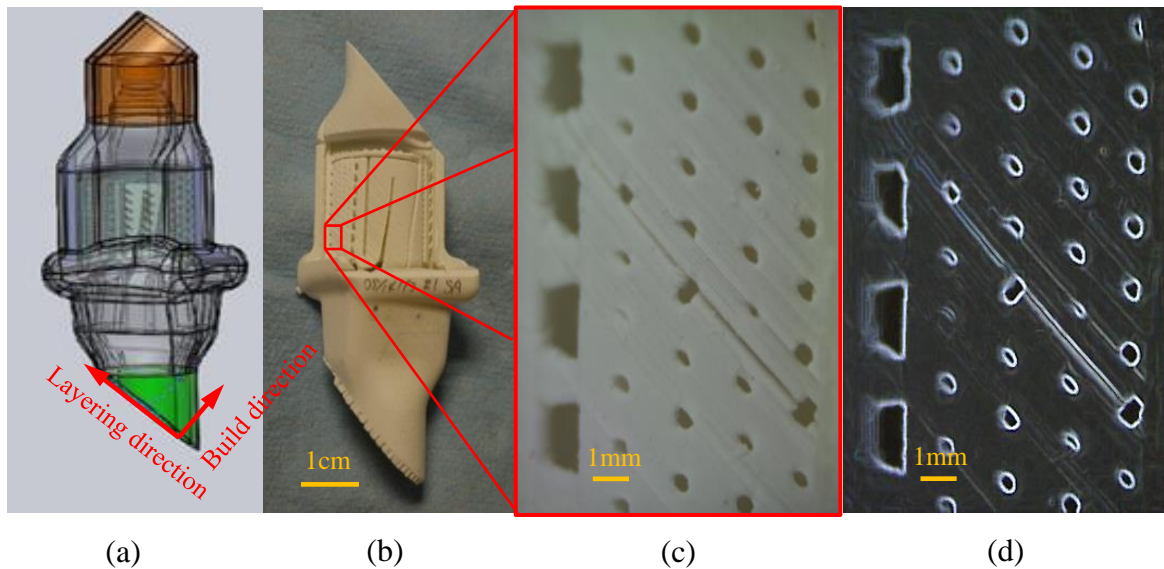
(a) and (b) are the CAD model of airfoil mold and the corresponding green body mold with core built by LAMP, respectively; a close view of the cracks on the mold's surface is shown in (c) and the processed picture is shown in (d).
